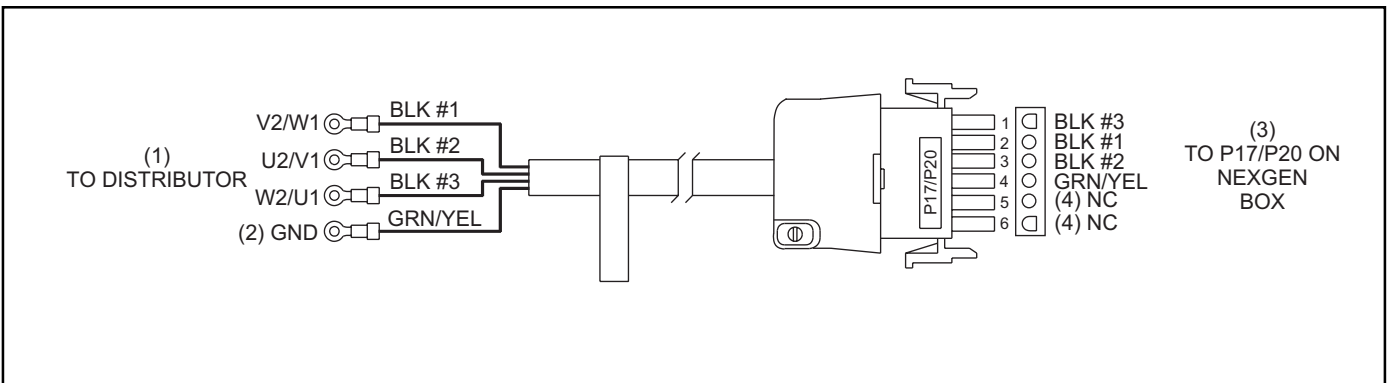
External Distributor Motor Cable Assembly (Part No. 47-142616-000)
